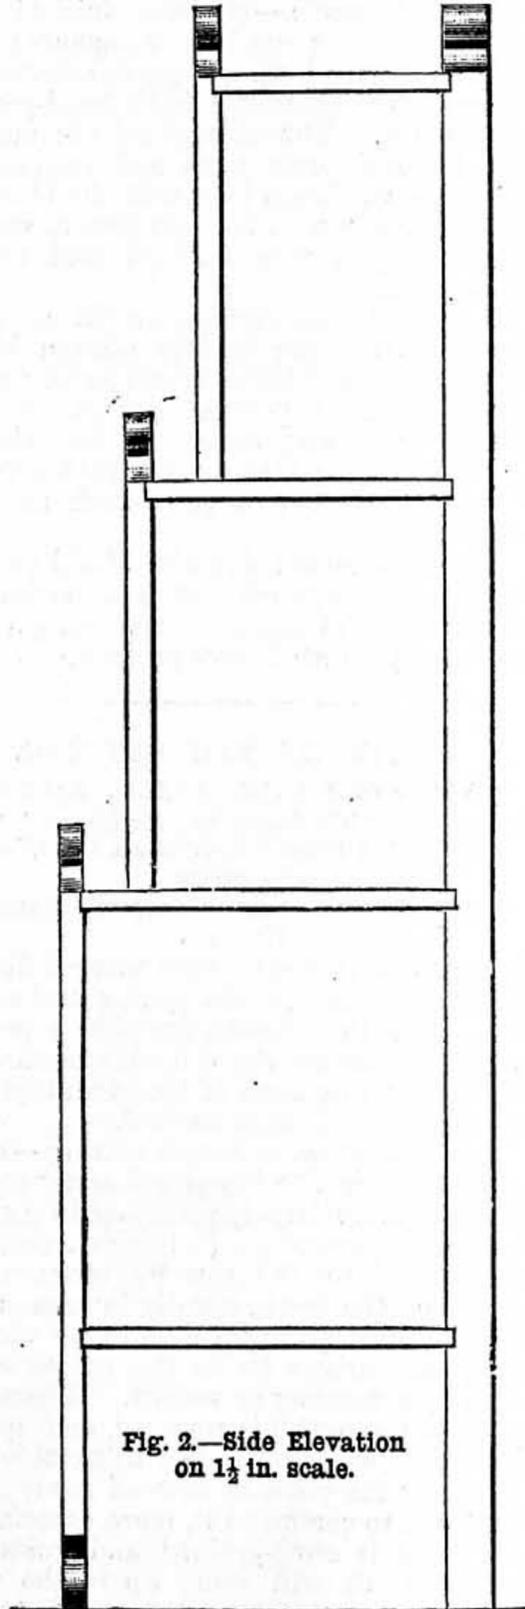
Side Elevation on 1 1/2 in. scale.
